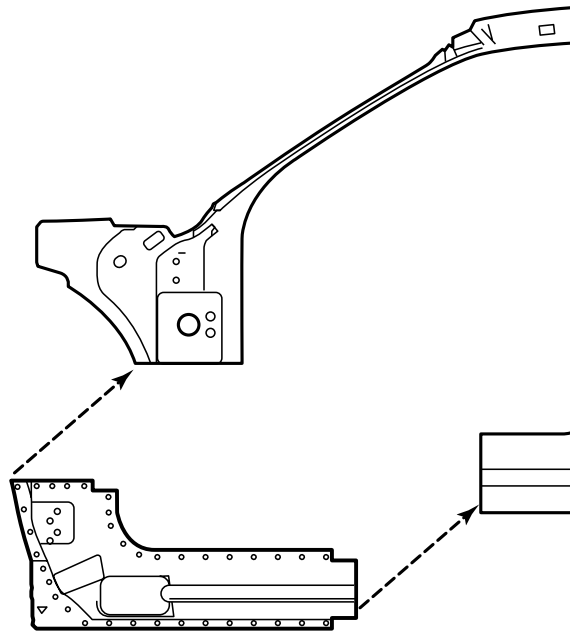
2000 DeVille Inner Center Pillar Detail
